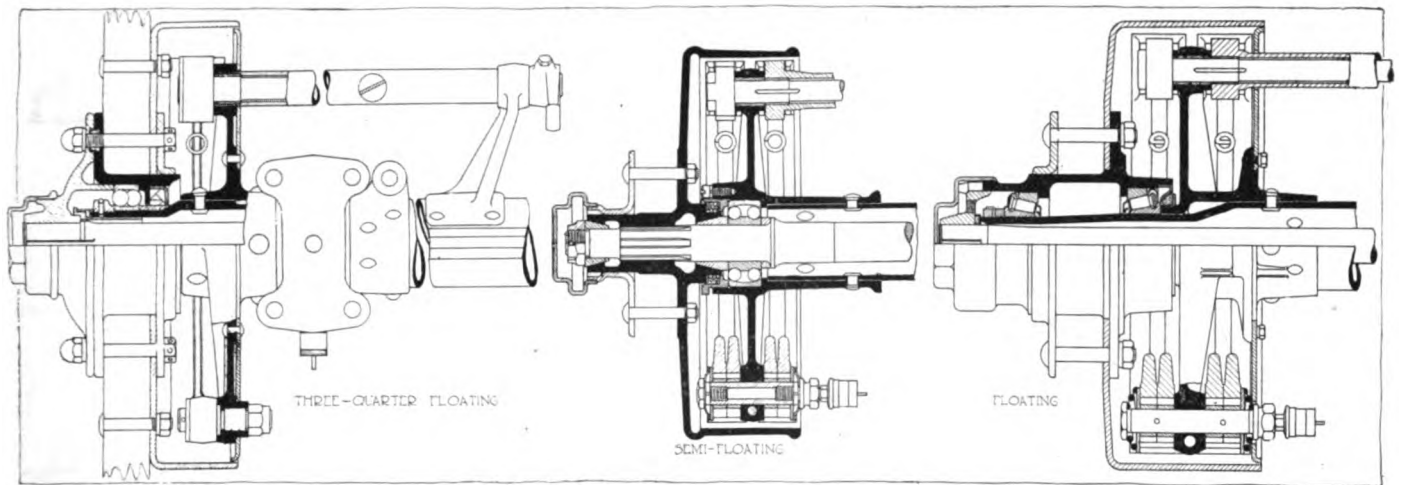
American Ball Bearing Co.'s three-quarter, semi and floating rear axes showing bearing arrangements at hub
